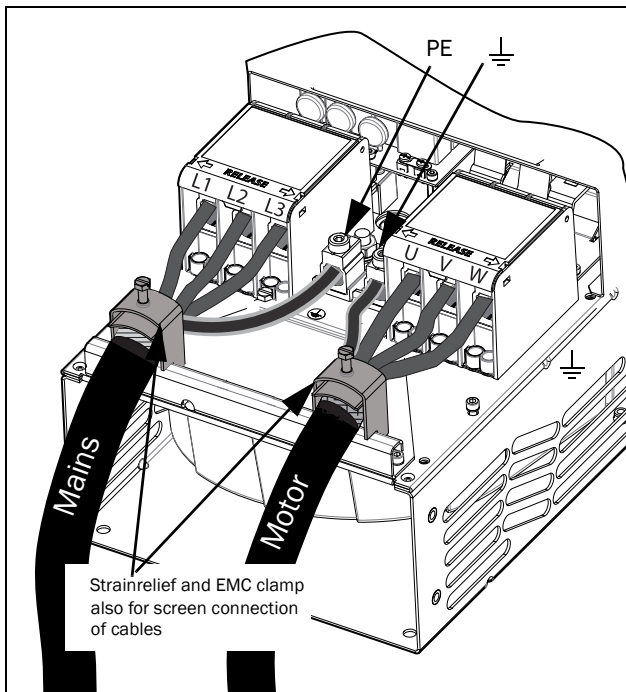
Mains and motor connections model 48-142 to 48-293 (Size E2 and F2) (principle drawing).
